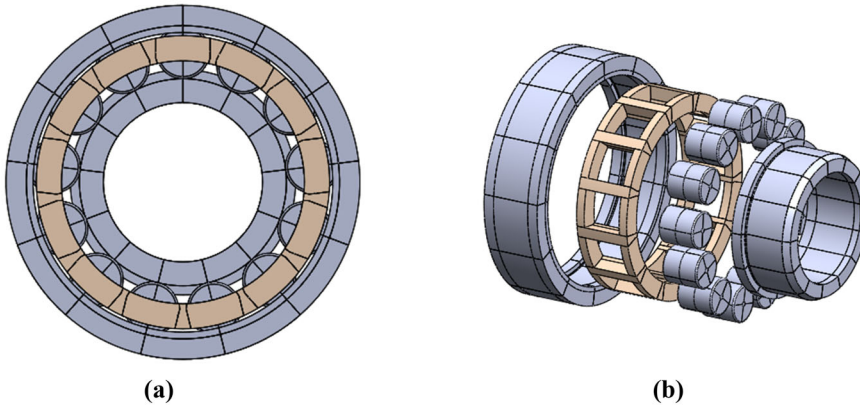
CAD drawings of NJ309 EP4. (a) Front view, (b) exploded view.
